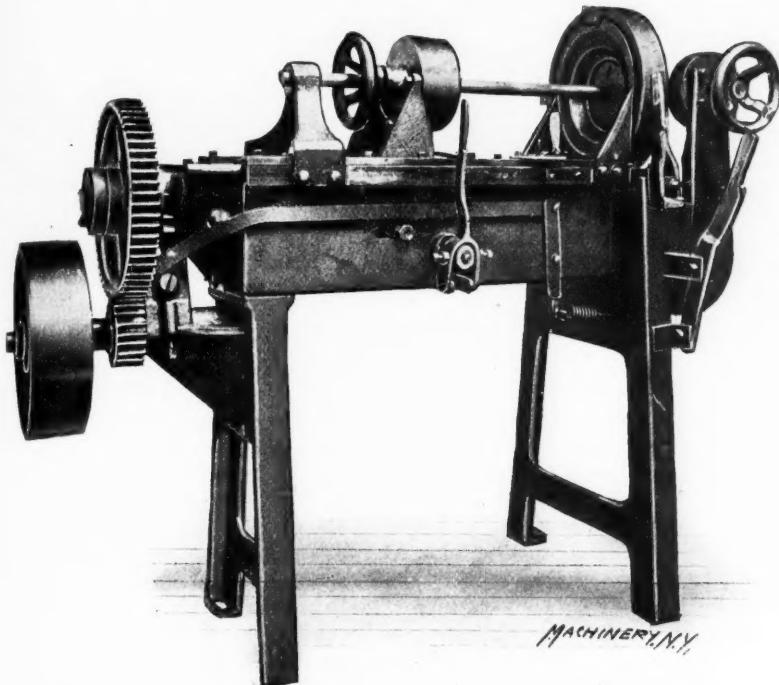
A Machine for Forming Ribbed Stove-pipe Elbows by the Rolling Process.
